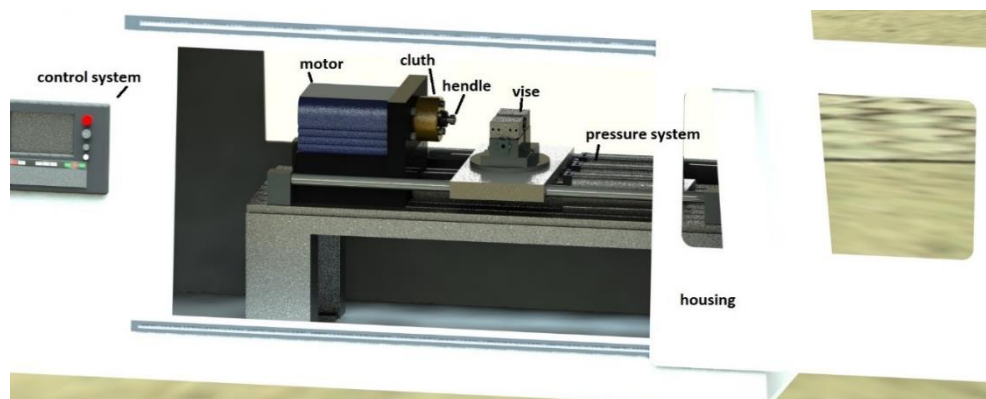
Schematic of Rotary Friction Welding equipment [54].
